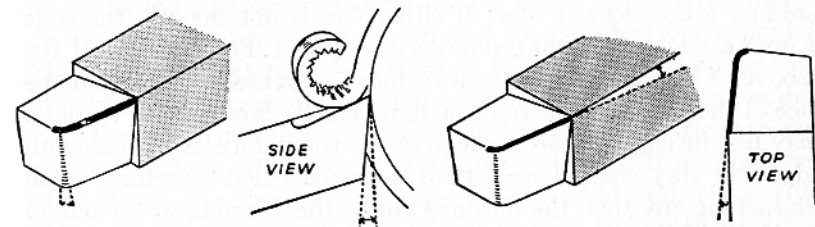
End clearance angle. (The Shell Oil Company)
